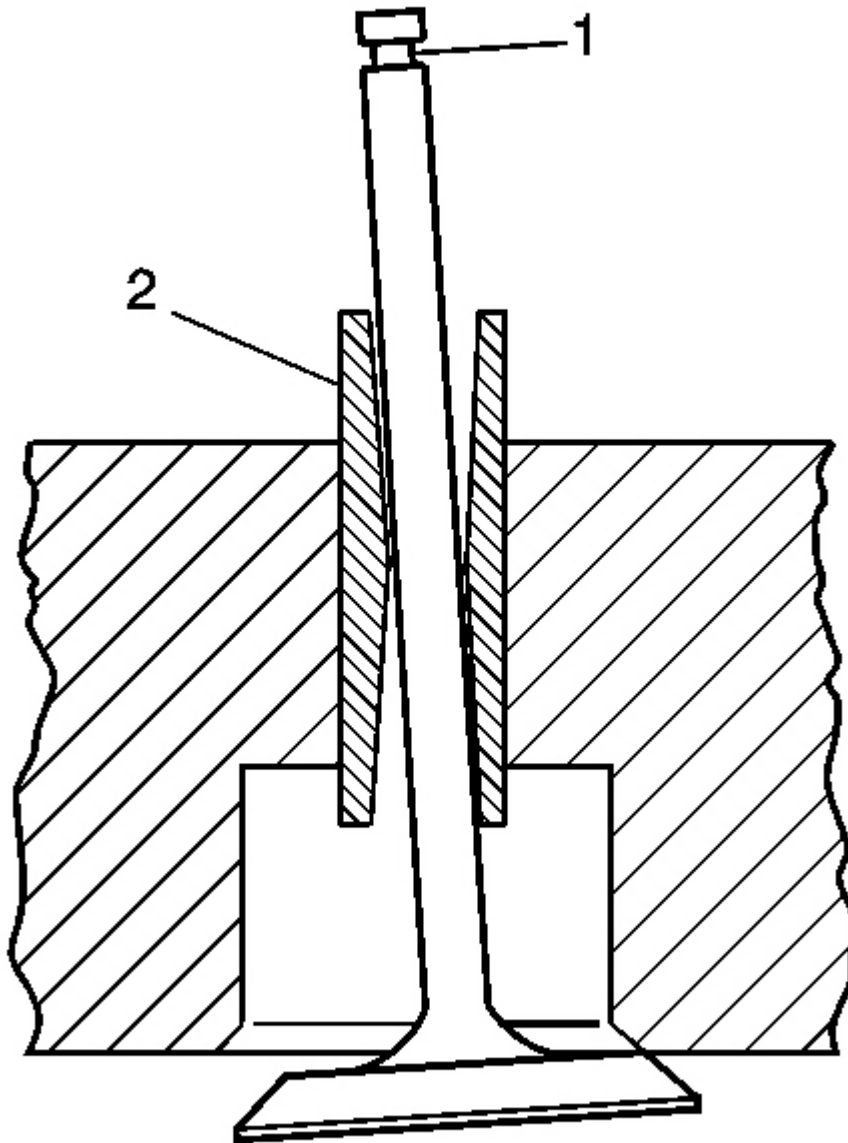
Inspecting For Excessive Valve Stem To Guide Clearance
